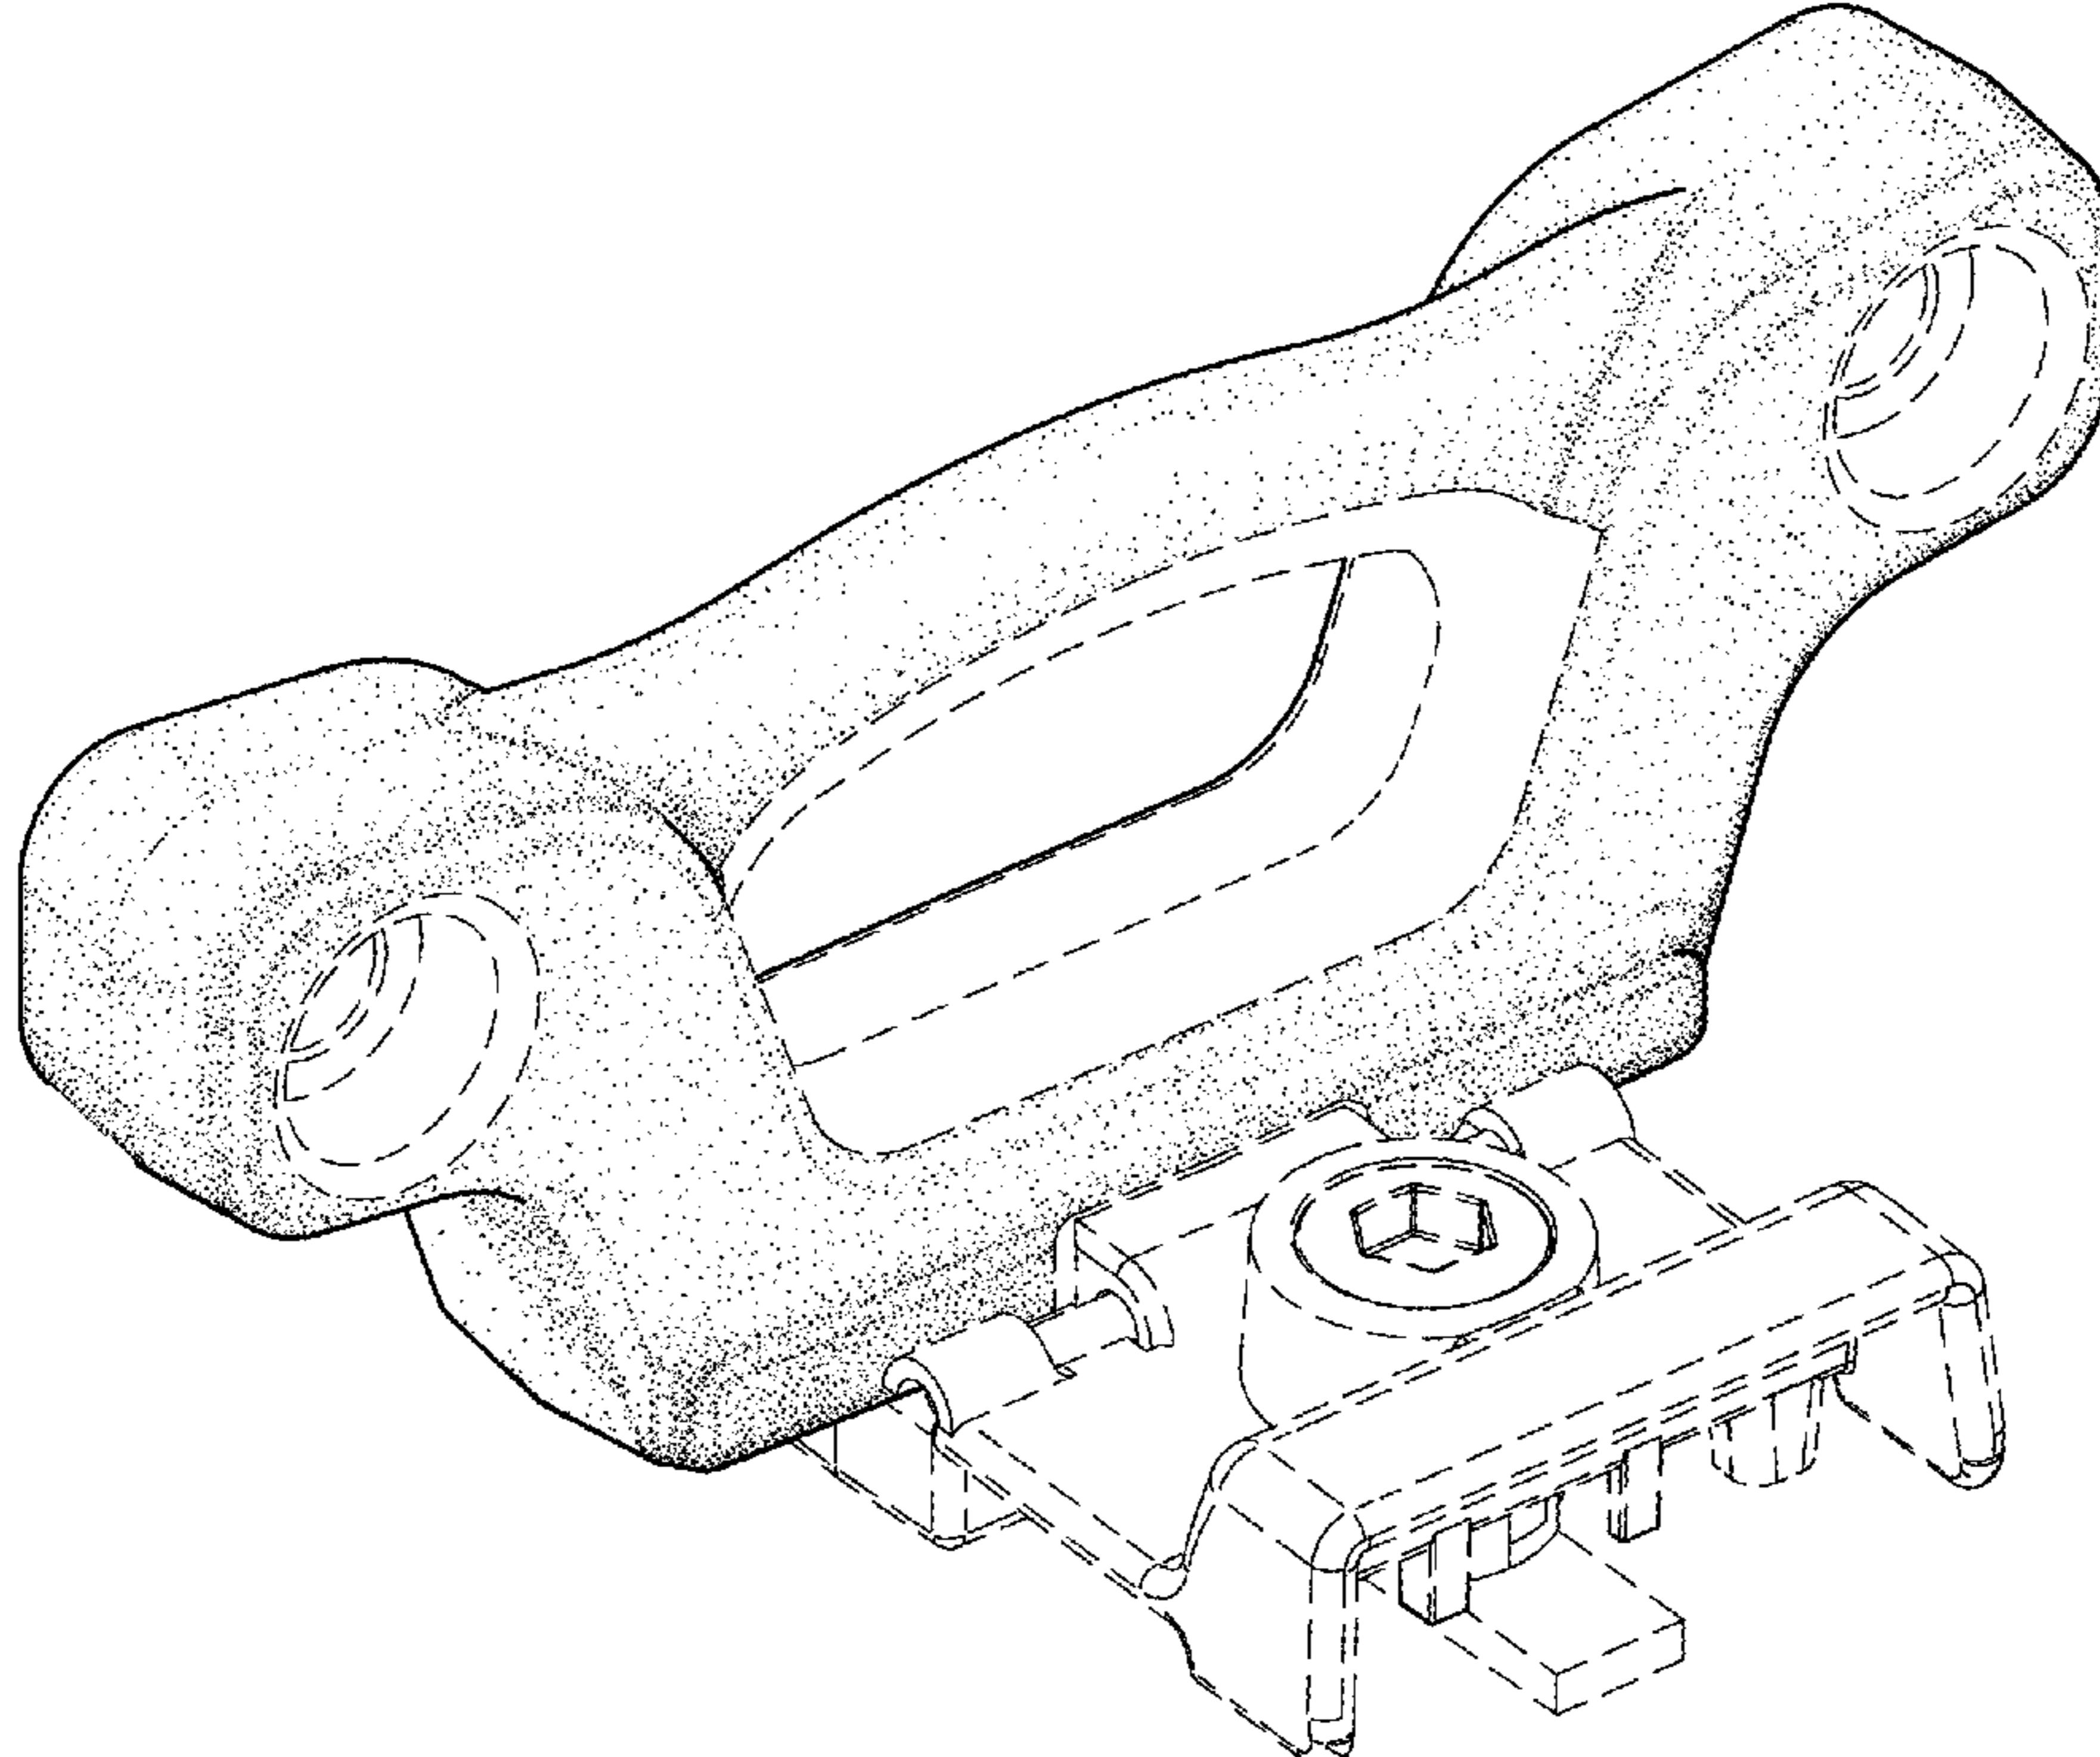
is a top view of the vehicle tie-down cleat assembly;
